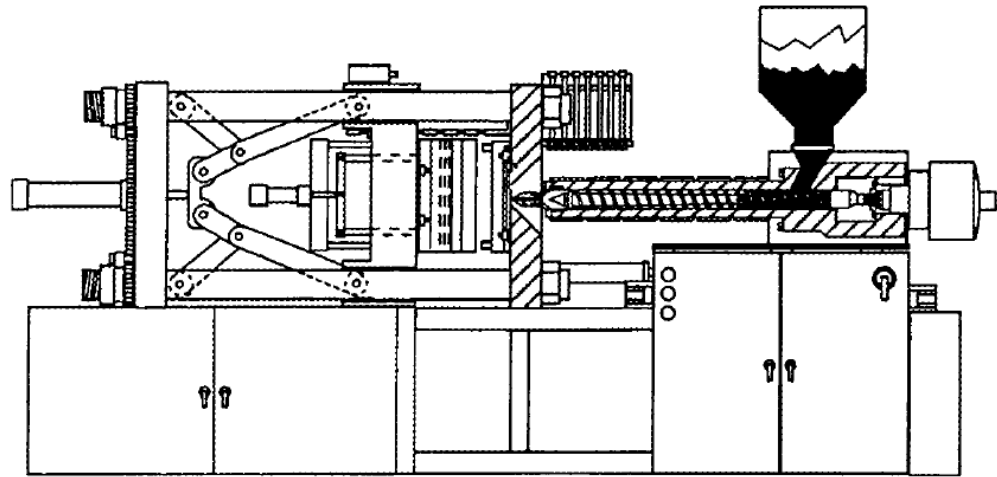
Reciprocating-screw injection-molding machine.¹²⁹
